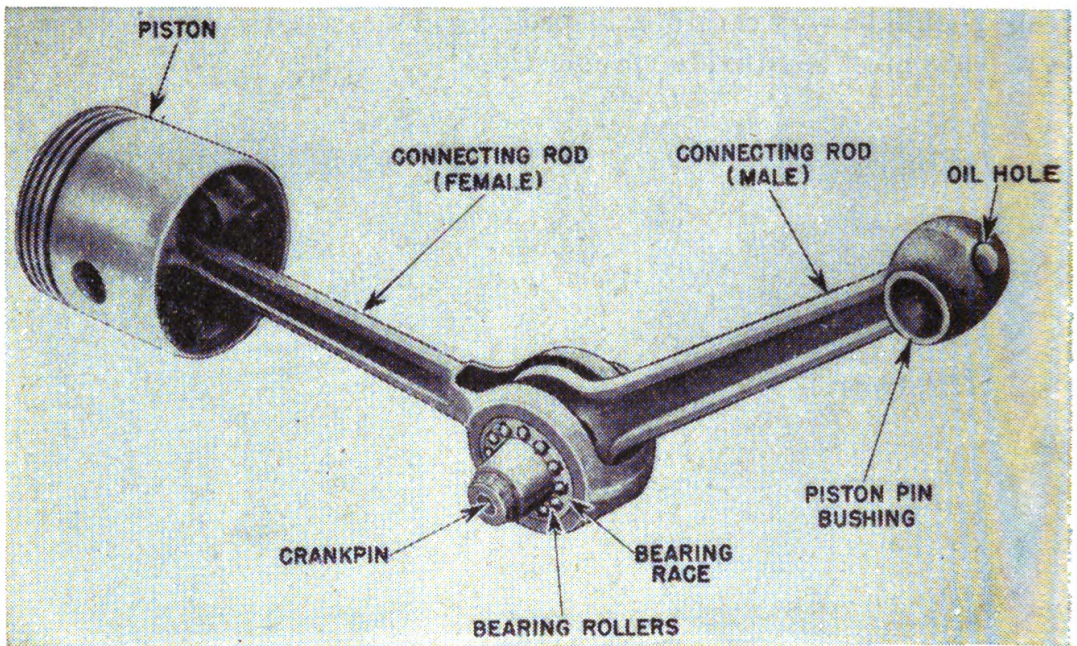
Two-cylinder V-type motorcycle engine connecting rods.
